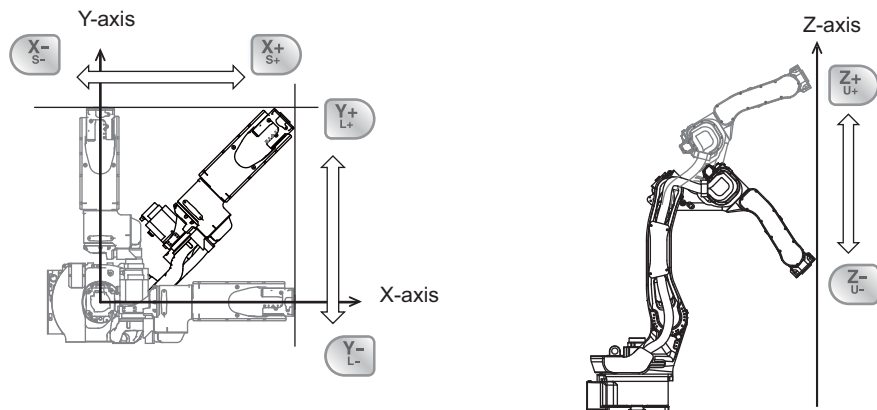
Moves parallel to X- or Y-axis      Fig. 2-2: Moves parallel to Z-axis
